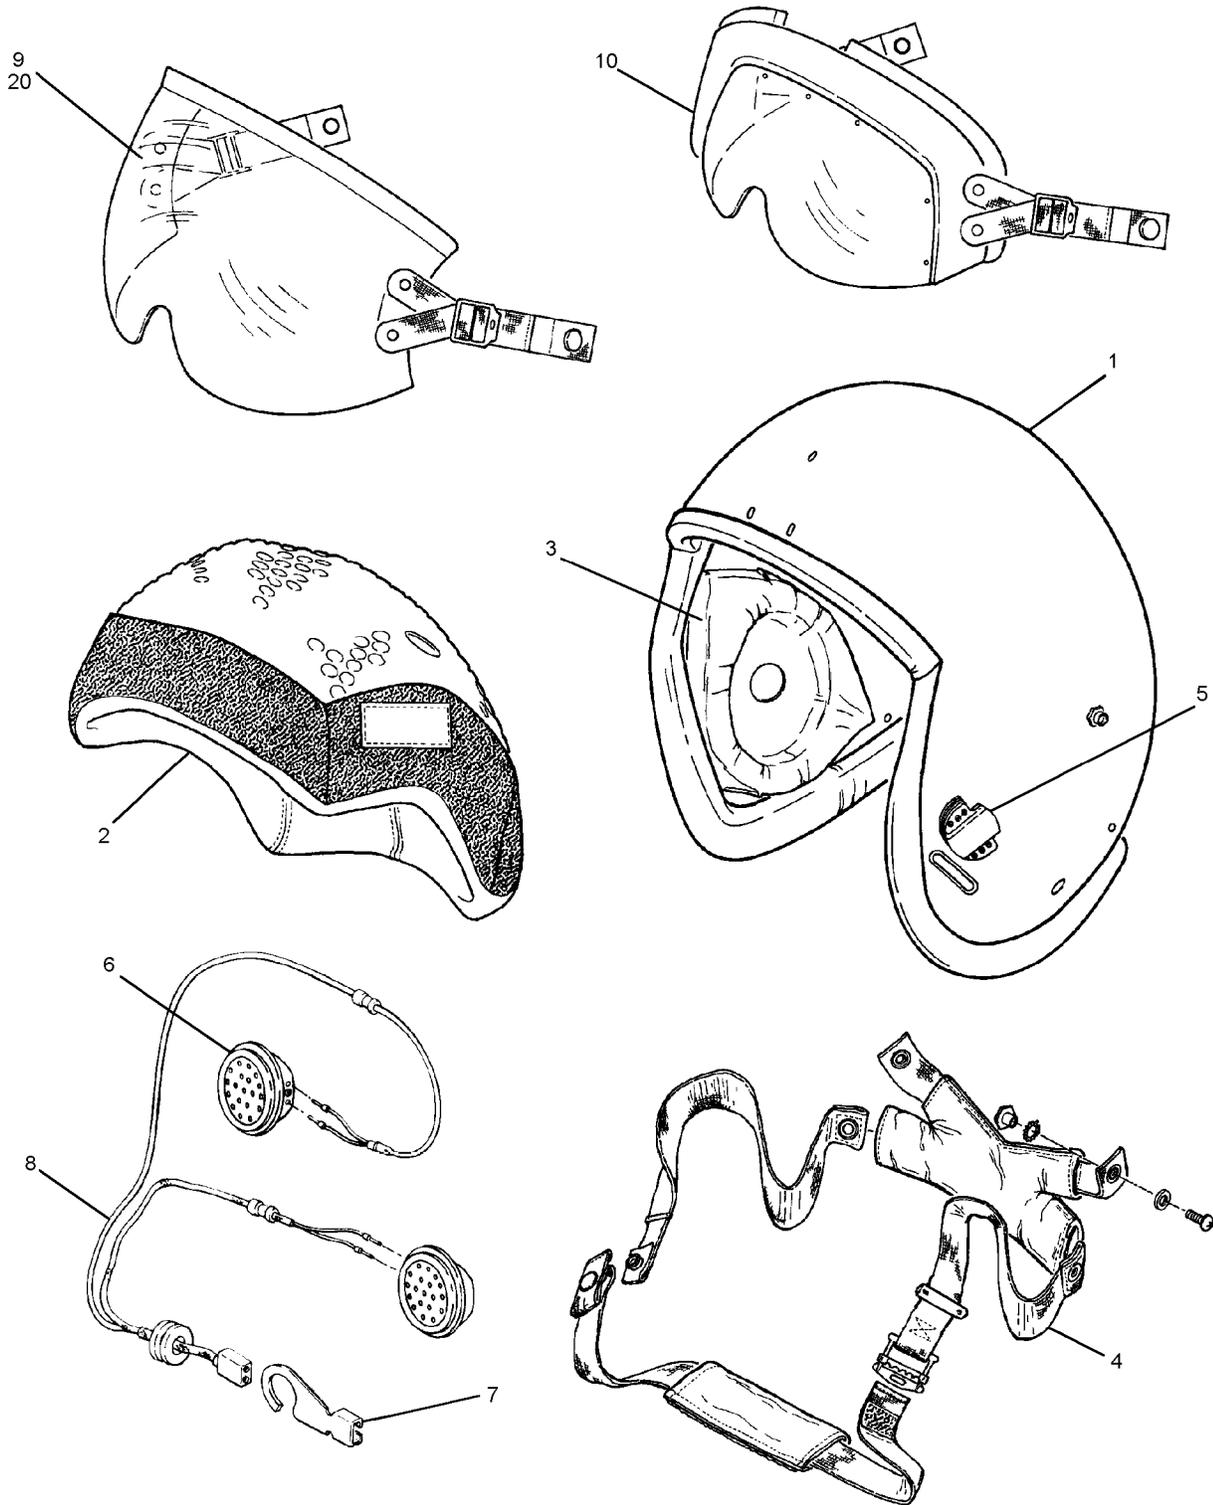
HGU-85(V)/P Helmet Assembly (Sheet 1 of 2)
